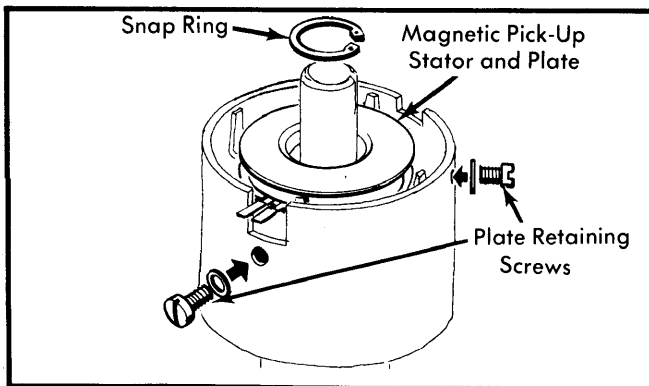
Removing or Installing Pick-Up Coil, Stator and Carrier Plate
